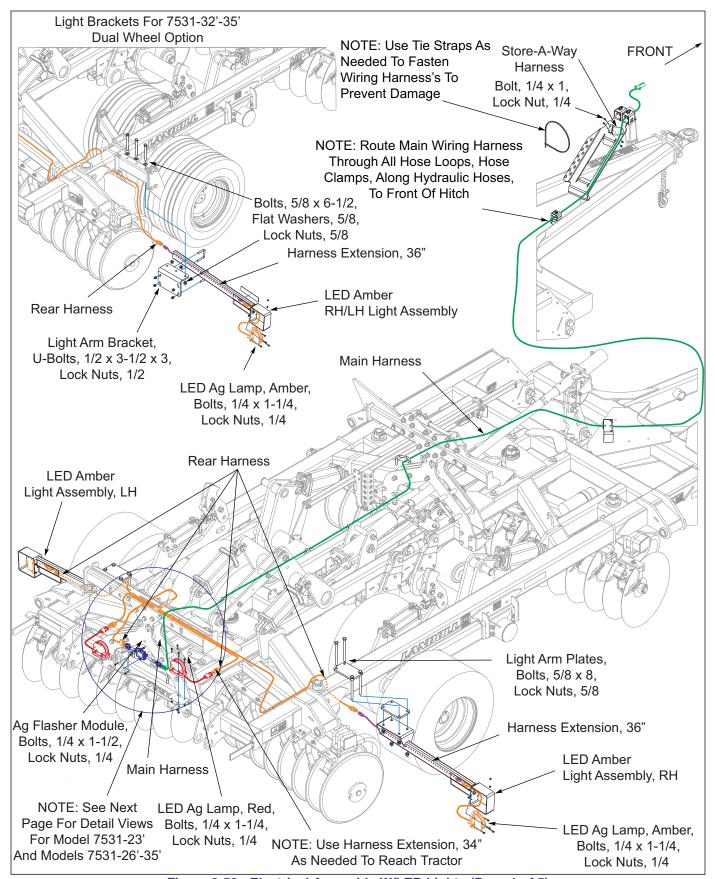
Electrical Assembly W/LED Lights (Page 1 of 5)
